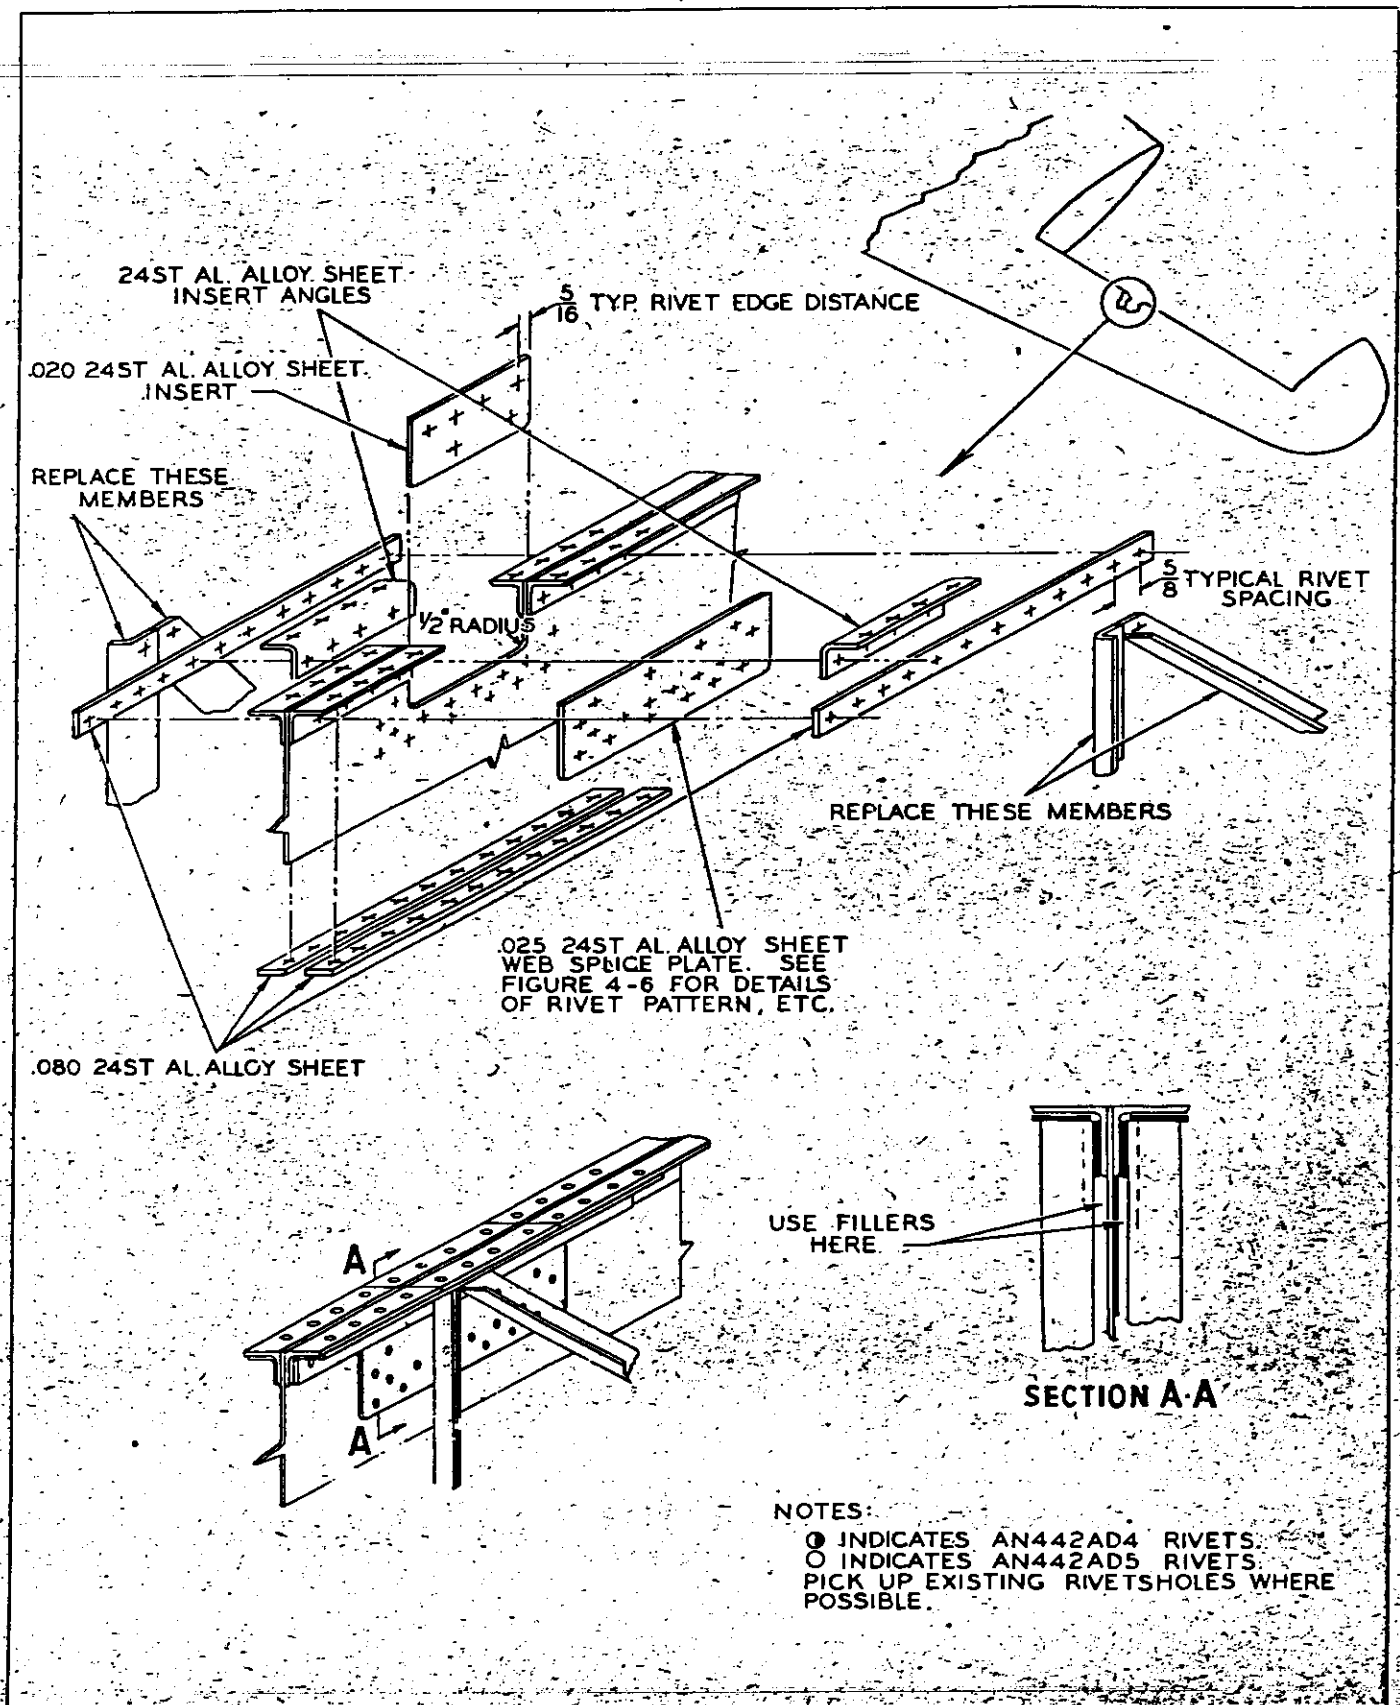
(Sheet 2 of 2 Sheets)—Horizontal Stabilizer-Spar Repair
